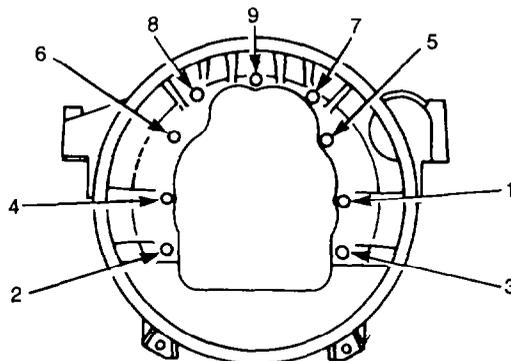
Flywheel Housing Bolts — Tightening Sequence
